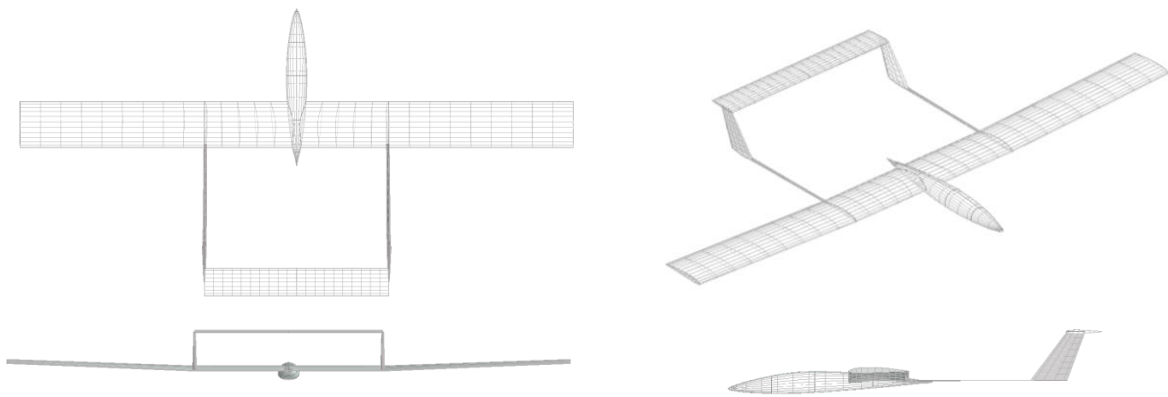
Motor glider UAV ATMOS-2CB (combustion engines)
